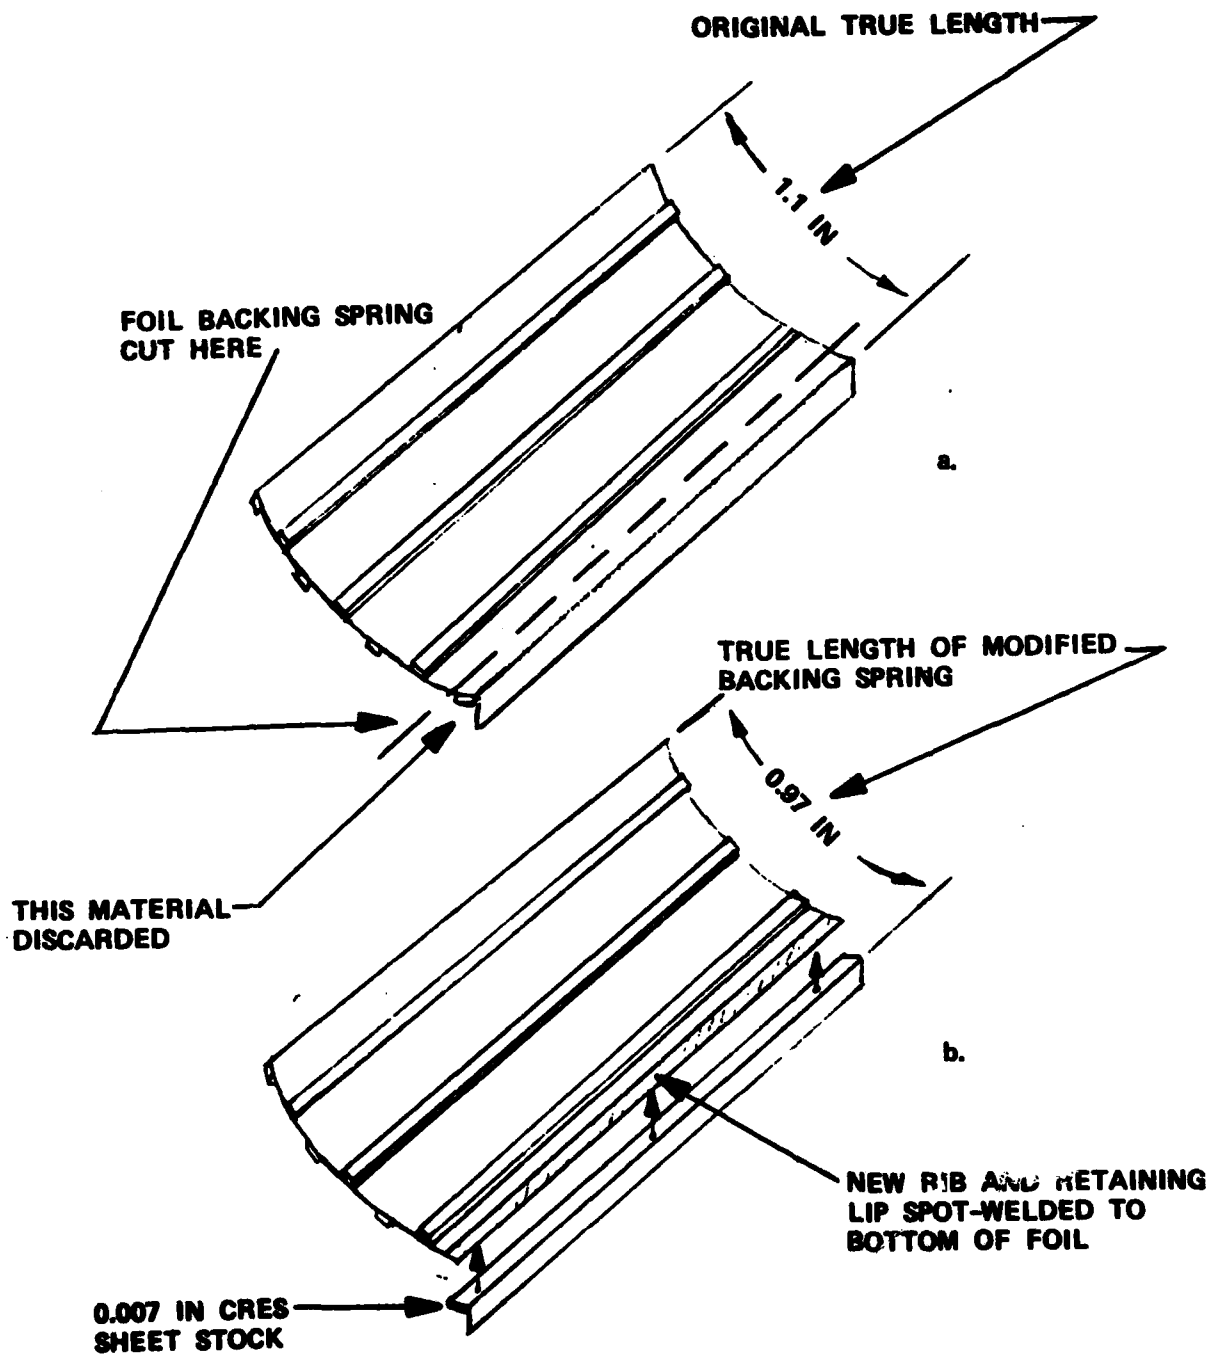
Foil Backing Spring Modification for 10-Foil Bearing.
